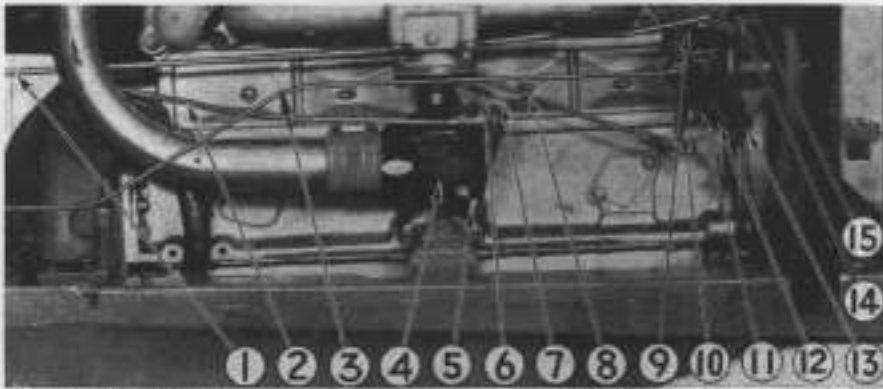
Model 201 carburetor and governor controls. Notice that governor is belt driven.
